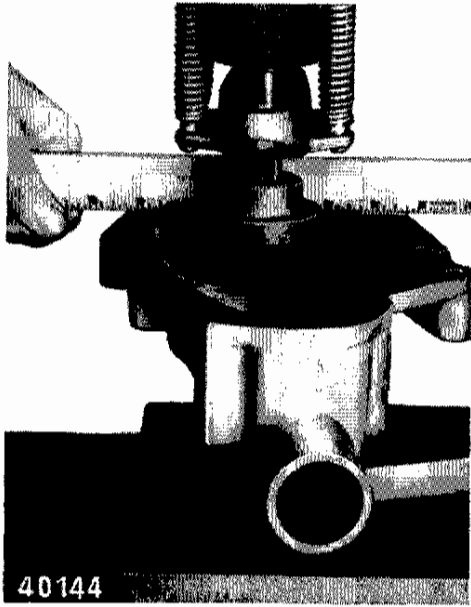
Pressing Impeller on Pump Shaft and Checking Clearance from Housing Sealing Face.
